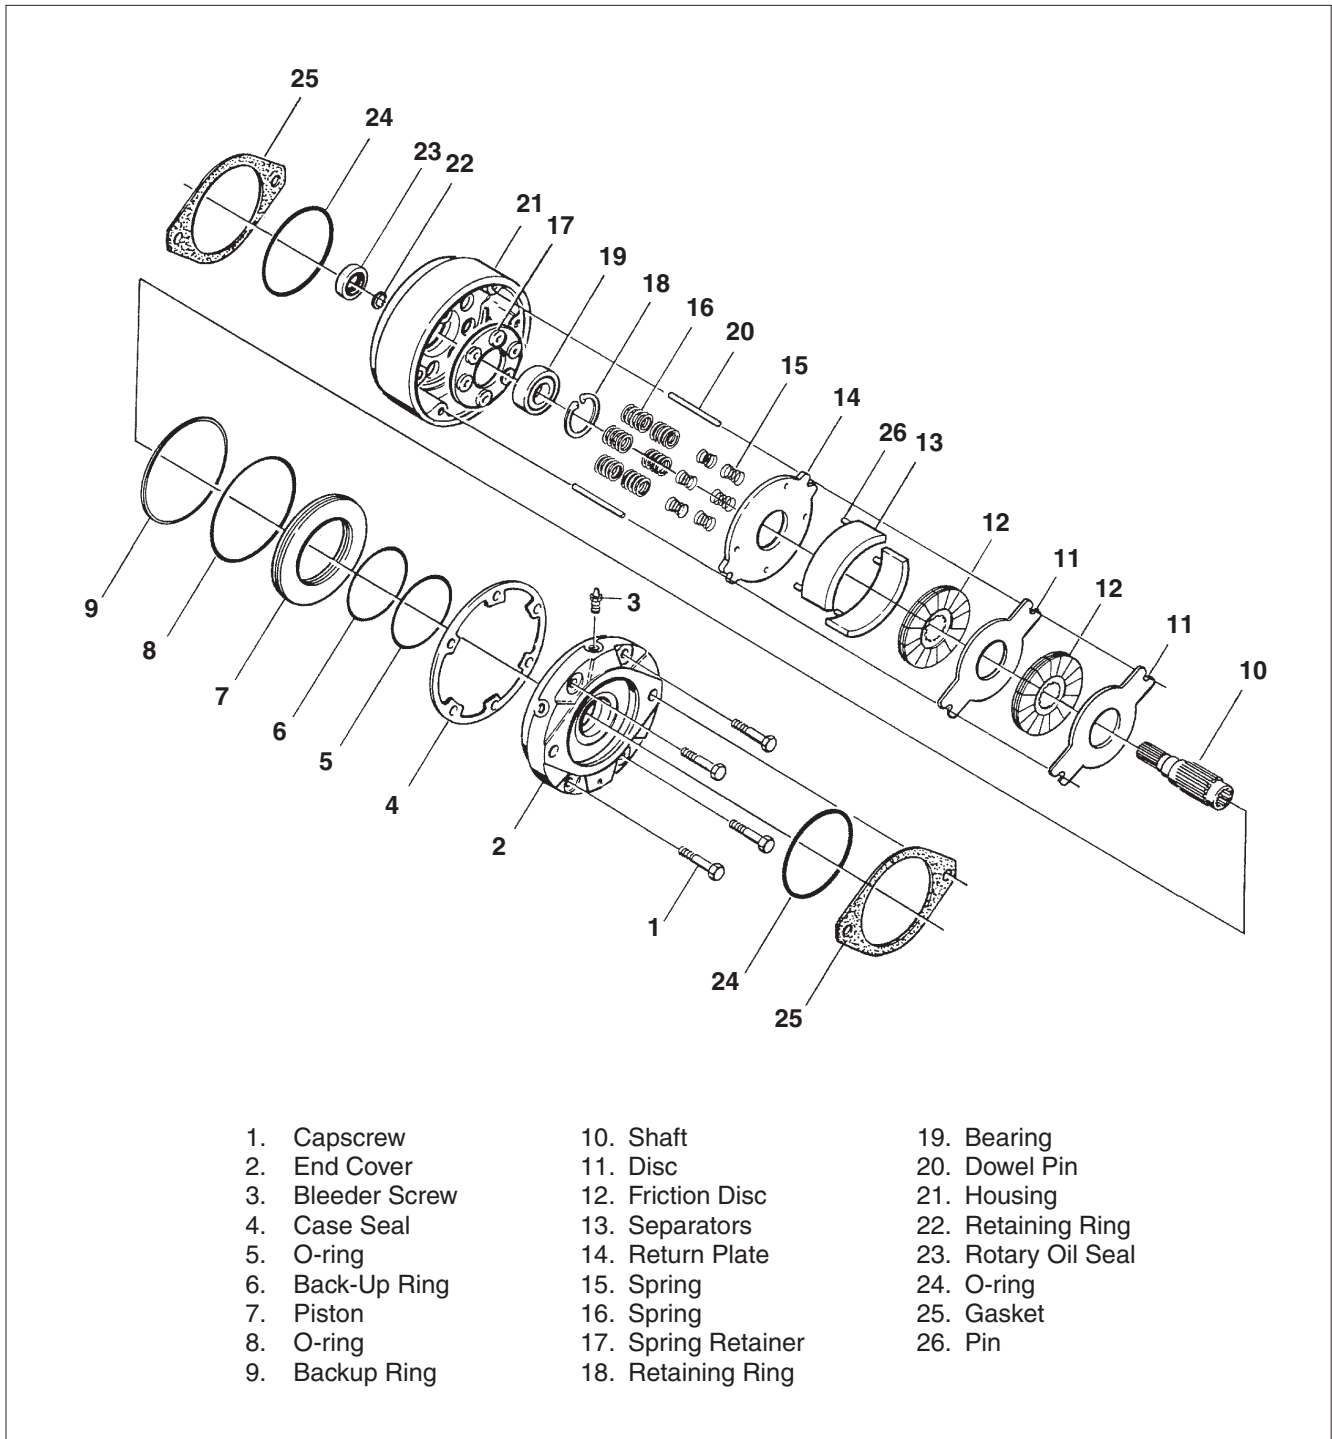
Swing Brake - Machines Built 1992 to Present
